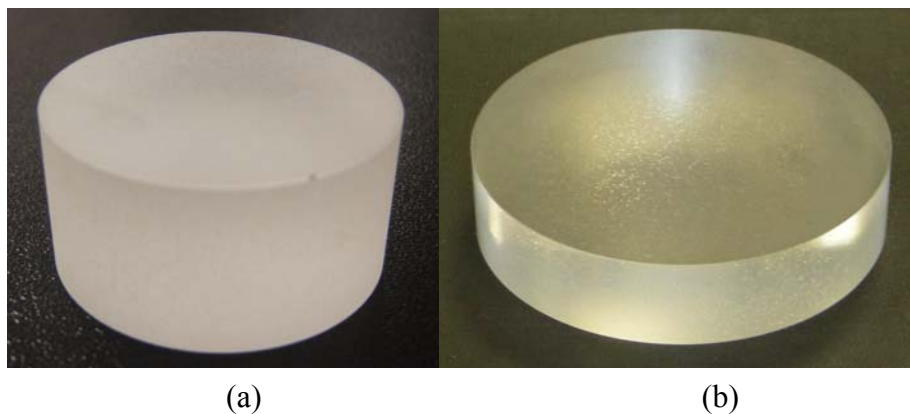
workpiece used for grinding (a) BK7 glass (b) Perspex
